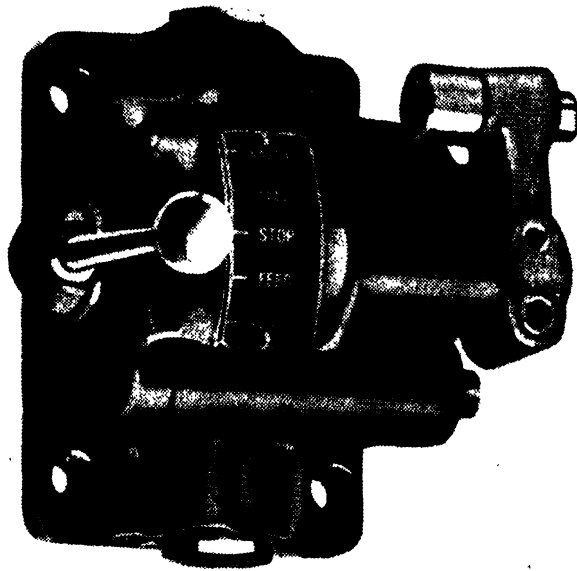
The 16X pilot valve. (*The Sundstrand Machine Tool Co., Rockford, Ill.*)
